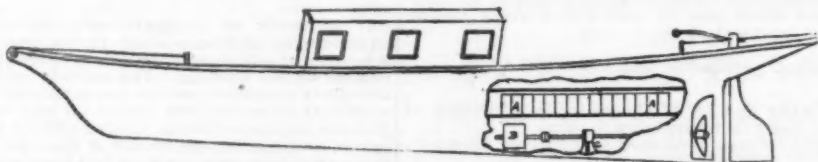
PART SECTION SHOWING CELLS, MOTOR, AND MODE OF ATTACHING PROPELLER SHAFT.
